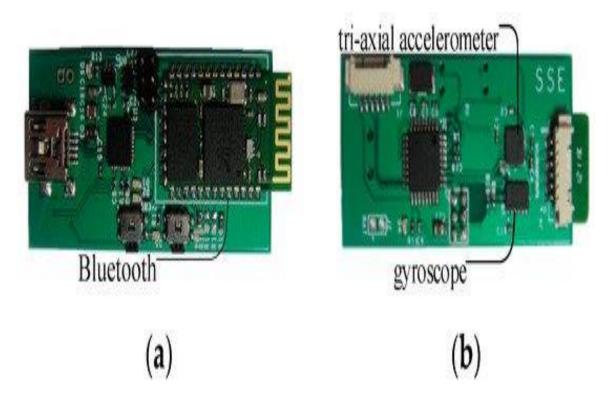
(a & b) Front & back view of sensor board with Bluetooth, tri-axial accelerometer and gyroscope
